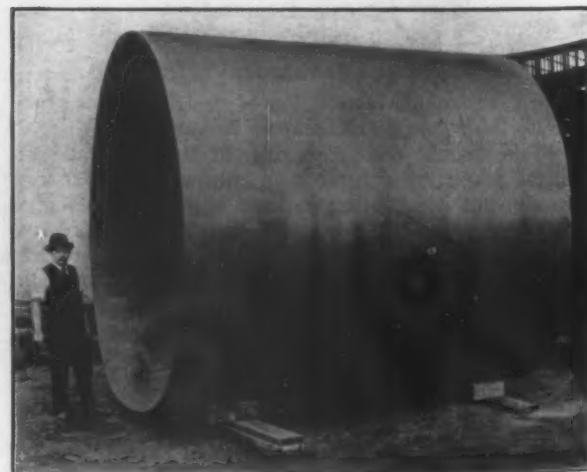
An 11-Ft. Lap Welded Steel Drum.
